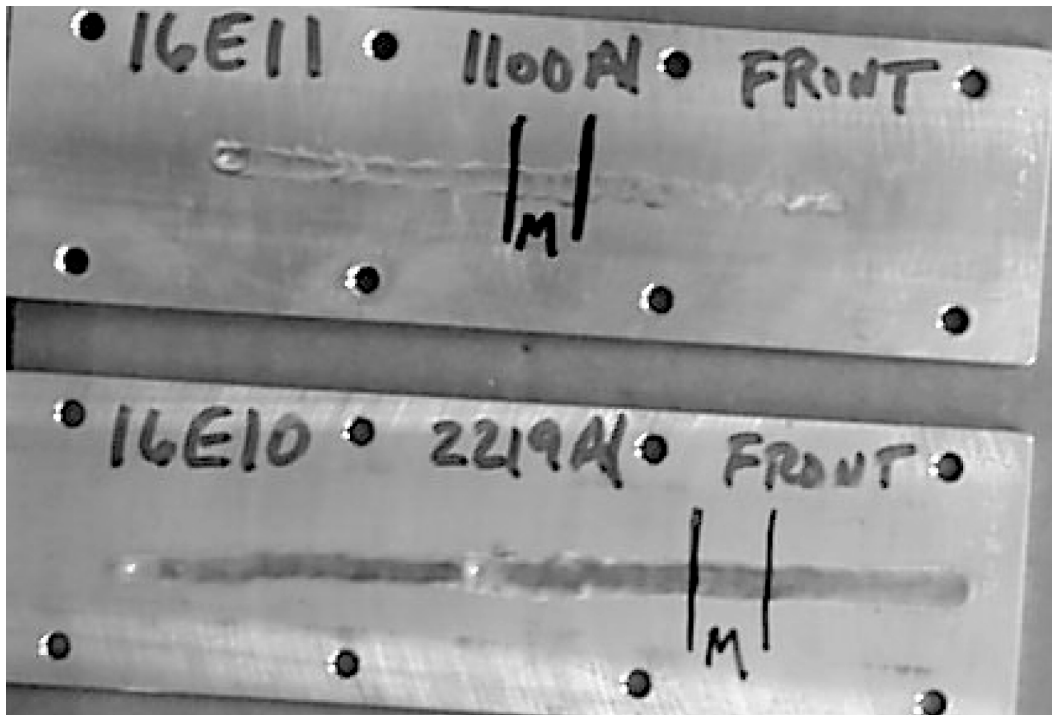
Al 1100 and 2219 bead-on-plate welds.
